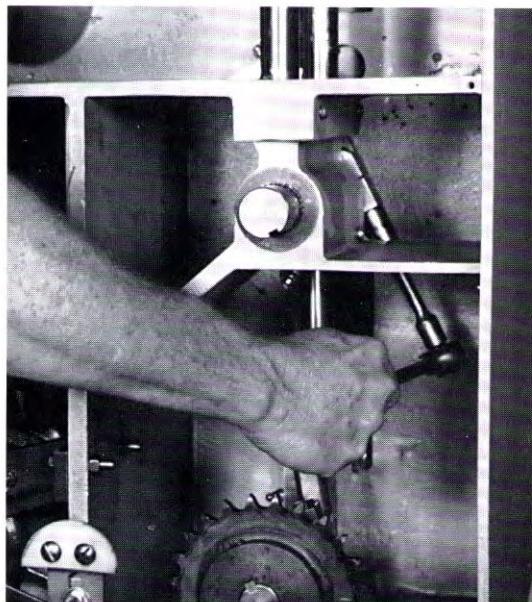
Using Socket to Loosen Upper Cup Crank Arm.
